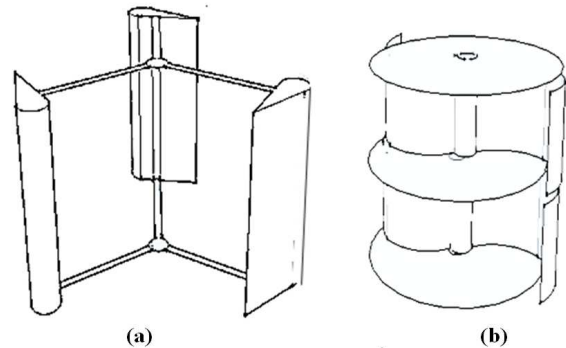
CAD design of the (a) H-rotor VAWT, (b) Savonius rotor.
